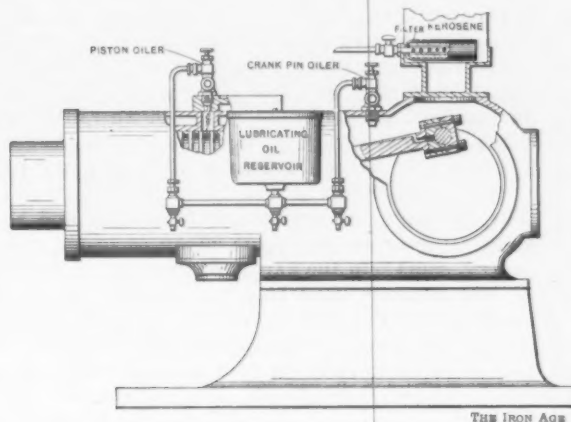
Sketch Showing Crank Pin and Piston Lubrication.
